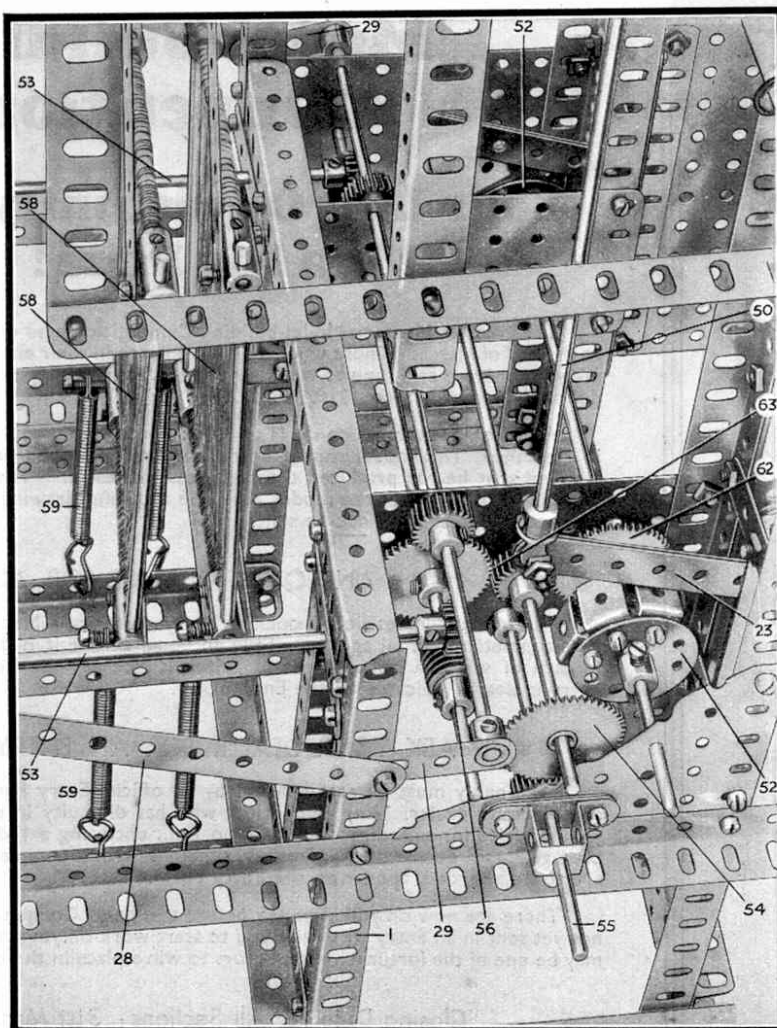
A close-up view of the "Picking Motion" mechanism.
